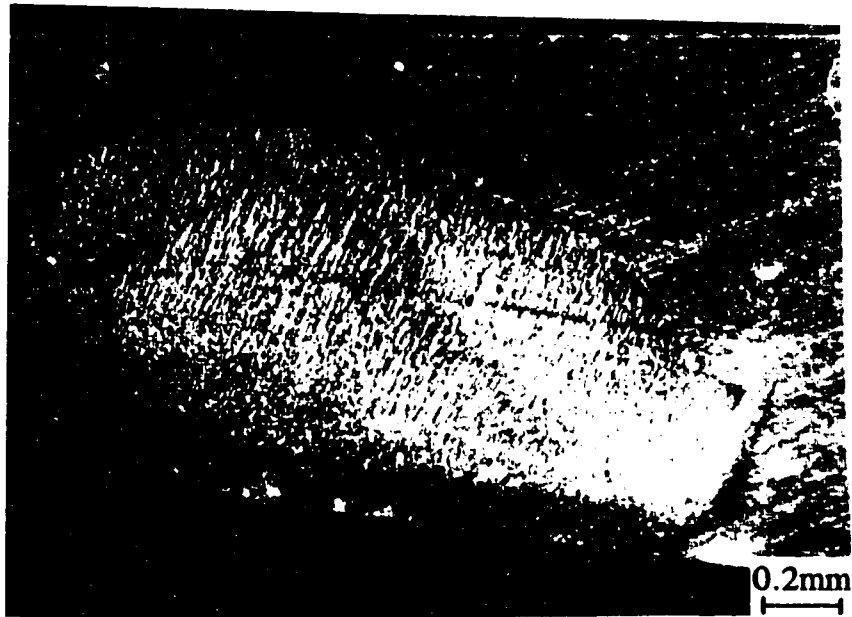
Typical optical photograph of the cutting edge of a cemented carbide tool used to machine AISI 1020 steel for 20 seconds.
